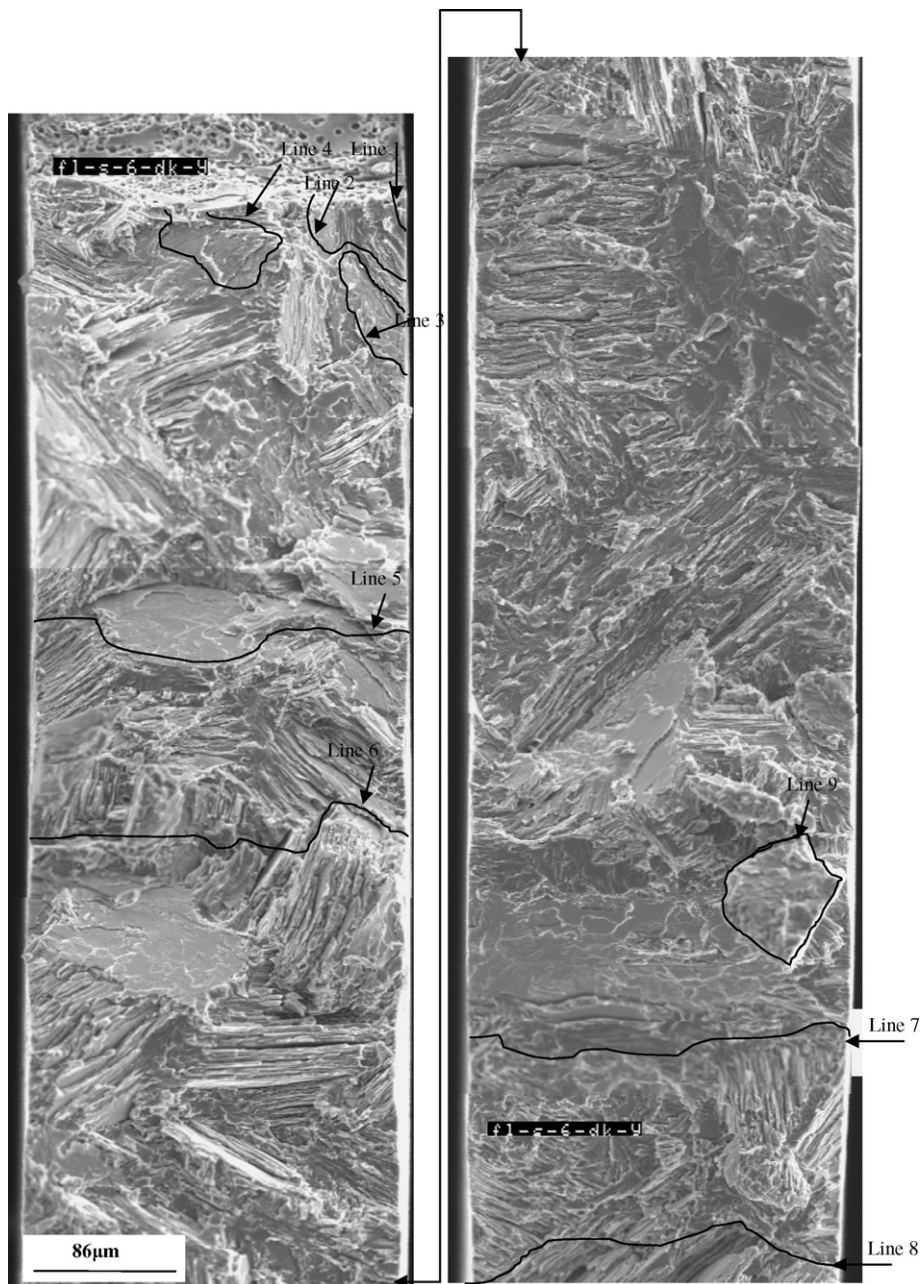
Fracture surface of specimen fl-s-6.
